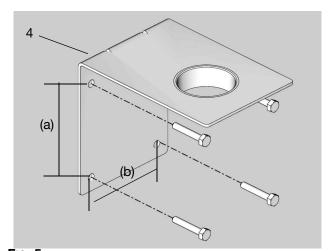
Dimension (a) = 104 mm Dimension (b) = 90 mm
